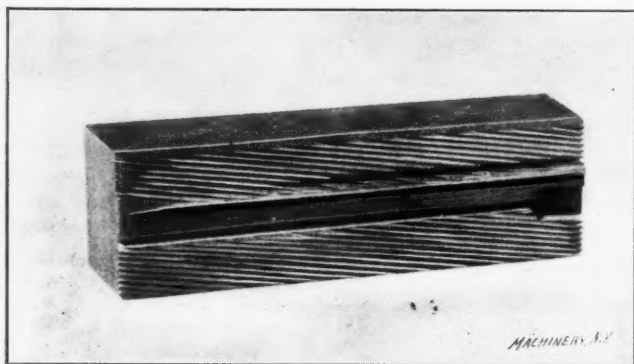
A Reversible Thread Rolling Die for Wood-screws
